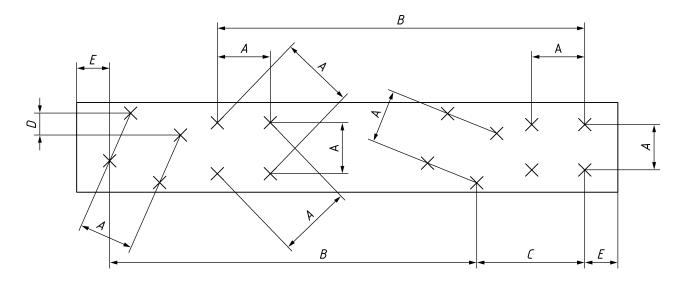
Measurement of tolerances on fastening components positioning
